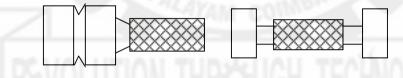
Progressive and Double Ended Limit Plug Gauges
